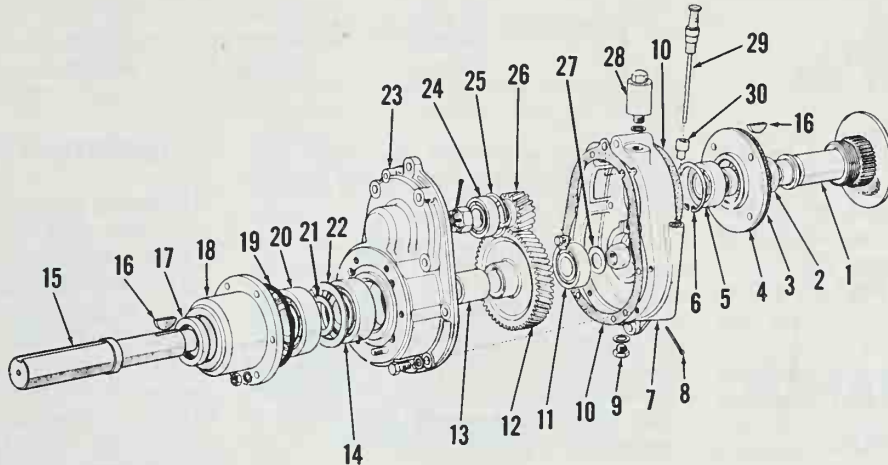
Exploded view of 2:1 or 3:1 reduction gear used on some ST engines.
